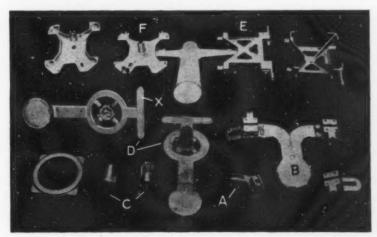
Some of the Castings for Electricity Meters Produced by Ferranti Ltd.
